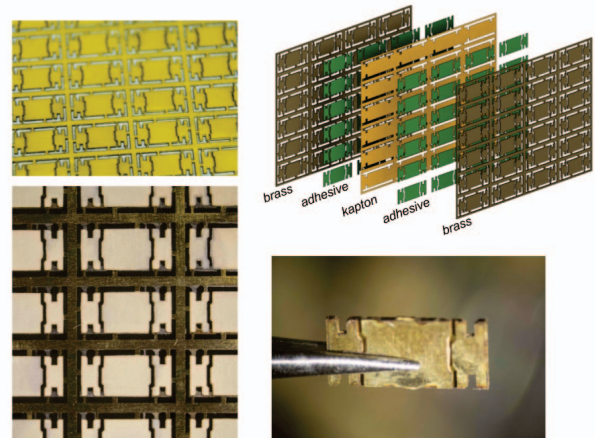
The fabrication steps involved in manufacturing the double-hinge passive mechanical parts include layer stacking, heat bonding, and singulation from the scaffold.
